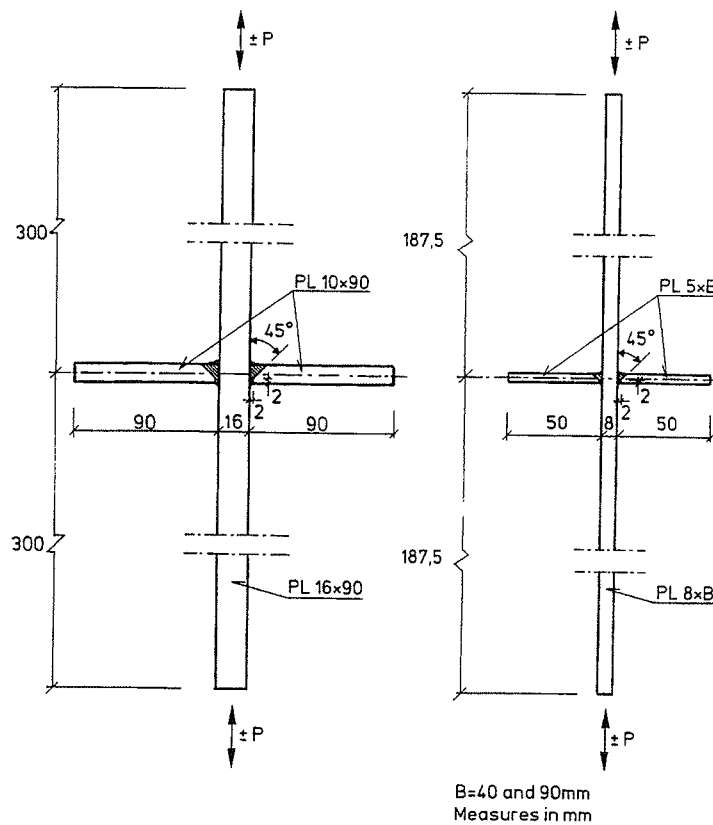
Welded plate test specimens with transverse attachments.
